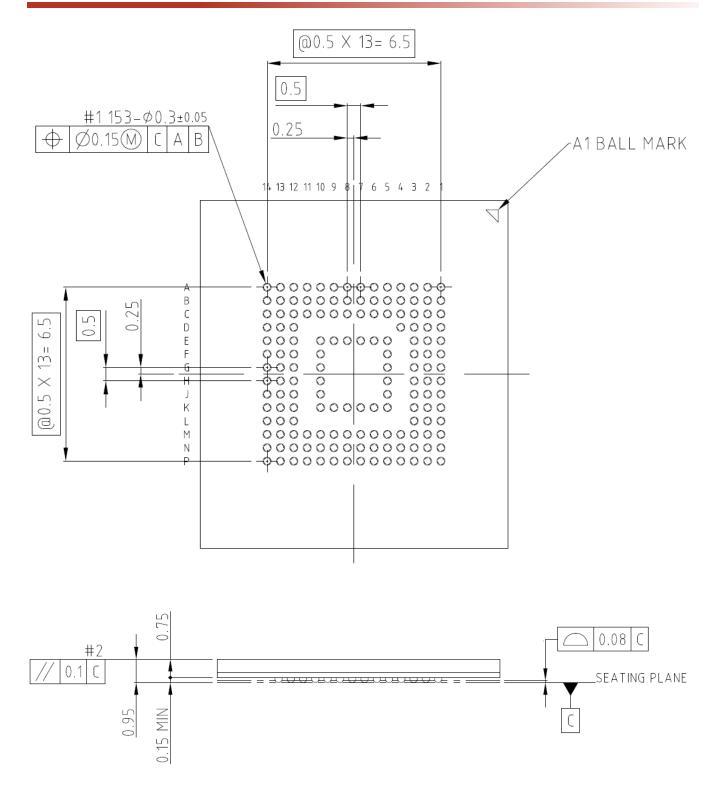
11.5 x 13.0 x 1.0mm Bottom & side View
